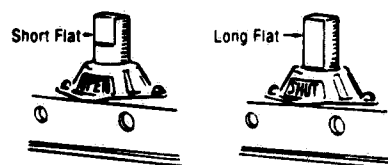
PINION ASSEMBLY ORIENTATION.
